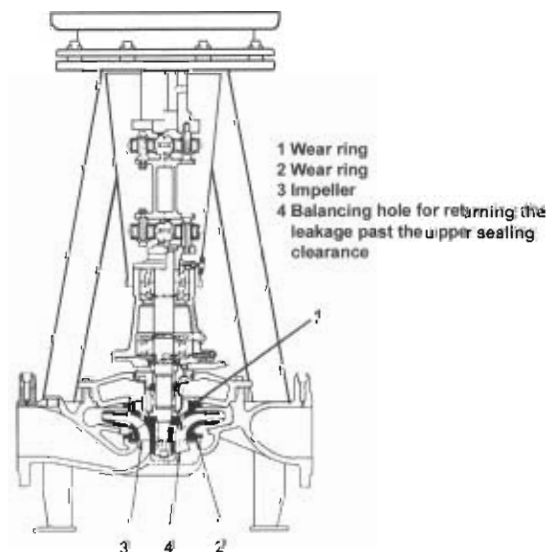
Vertical inline pump with support feet, bearing bracket and extended motor stool for spacer coupling.
